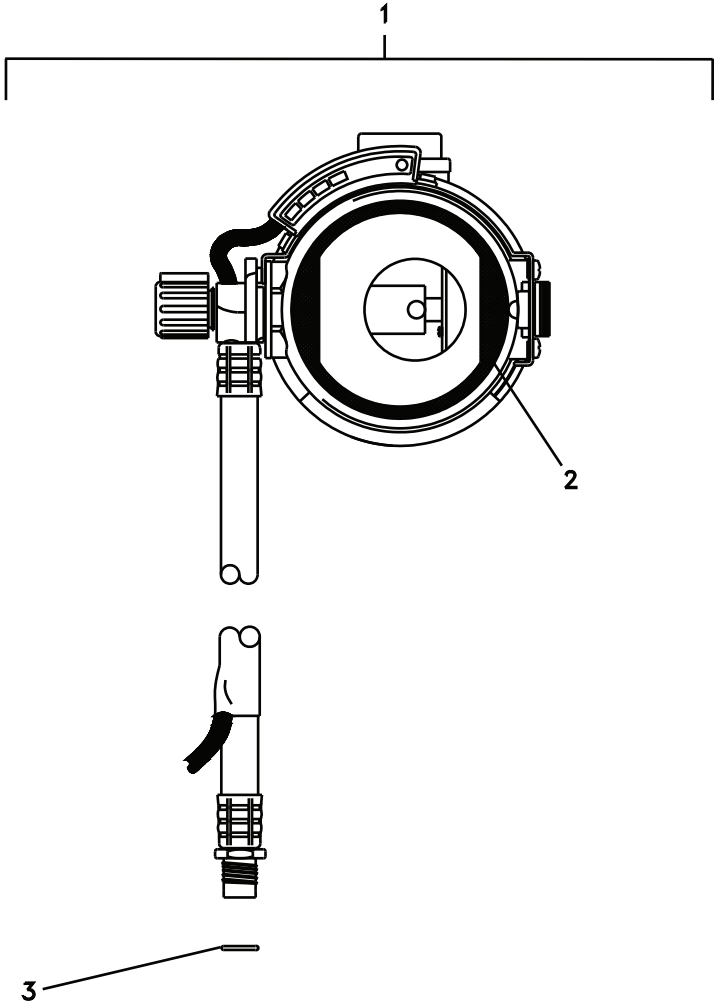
Mask-Mounted Regulator with Heads-Up Display (HUD)
